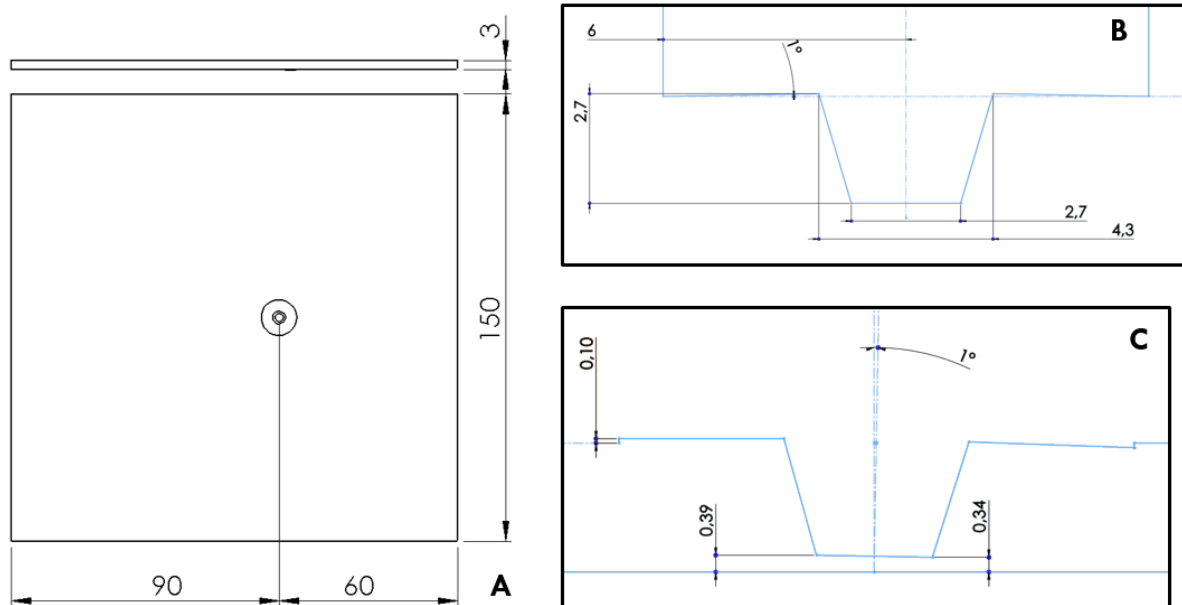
Domain dimensions (A), tool dimensions (B) and tool positioning (C)
